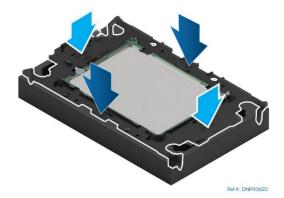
Installing Processor Carrier Clip onto Processor-Part 2
